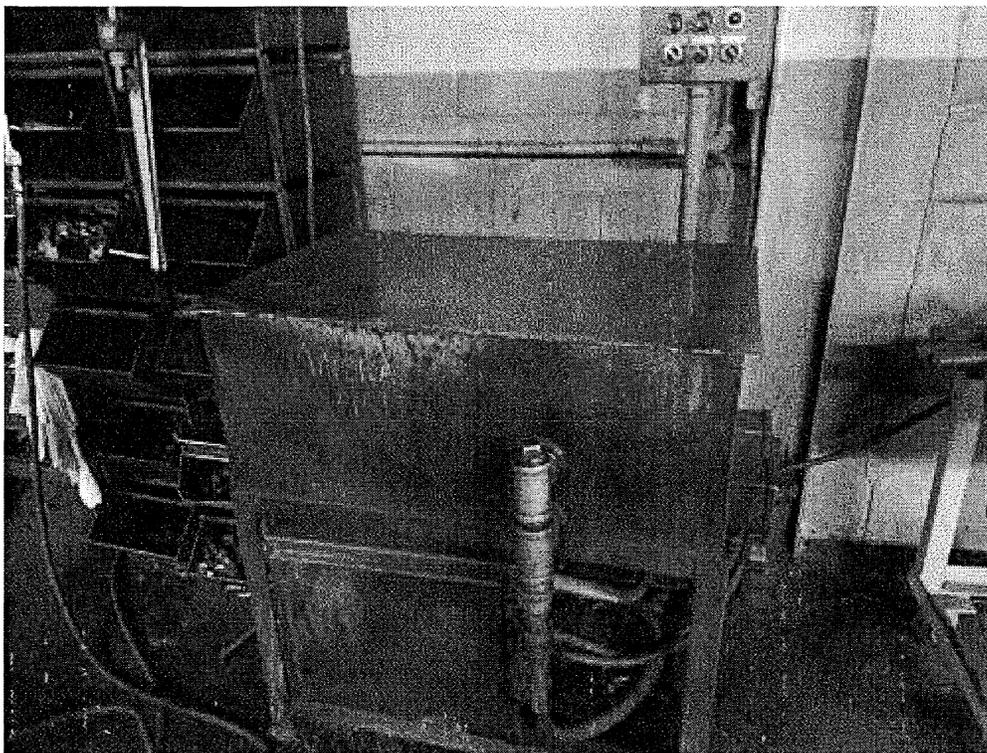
(cold cleaner) : Cold cleaner in the Weaver Jack building.
